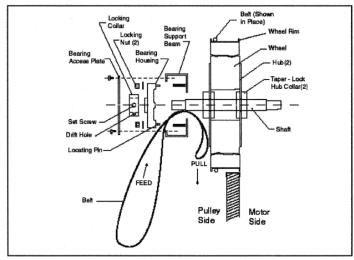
Belt Replacement (Figure 8 shown with diameter seals removed)
